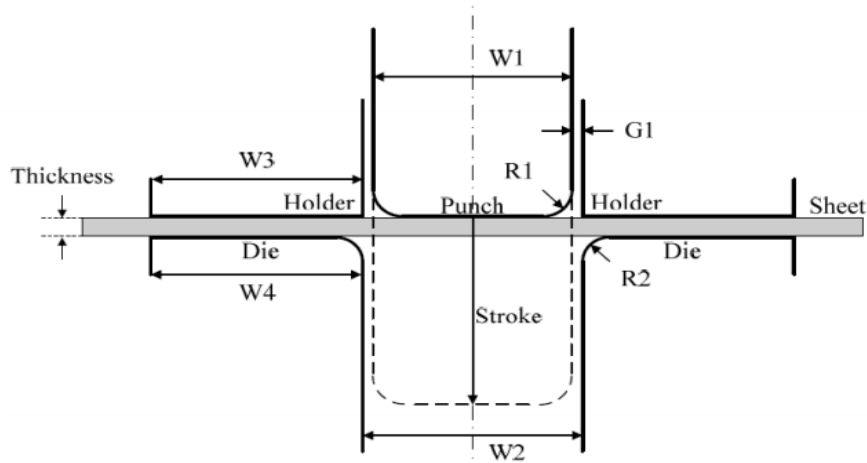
Schematic of a U-shaped Bend test [20]
